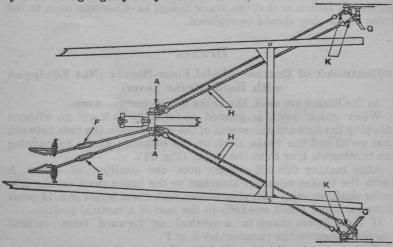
Brake adjustment, Model Four-Ninety (without handbrake.)
